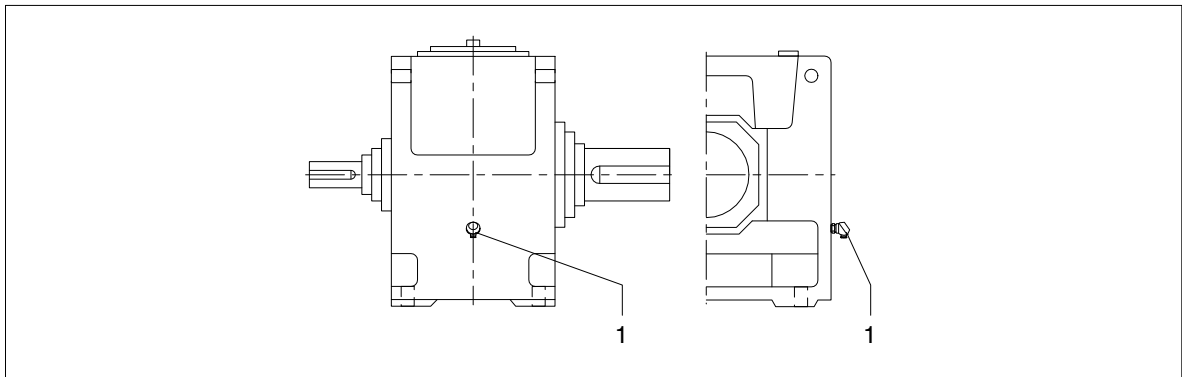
Oil-temperature measurement on gear units types H... and B...
